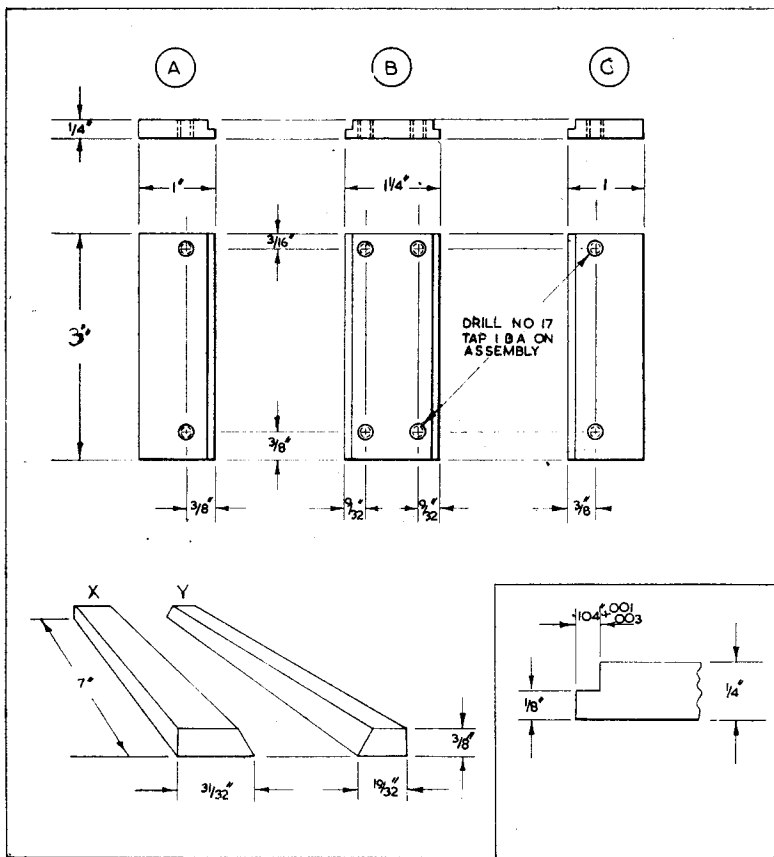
T-piece details. A and C one off. B three off. Below, slideway members. Inset, lip dimensions for (thinned) $\frac{5}{16}$ in. BSF bolt head
